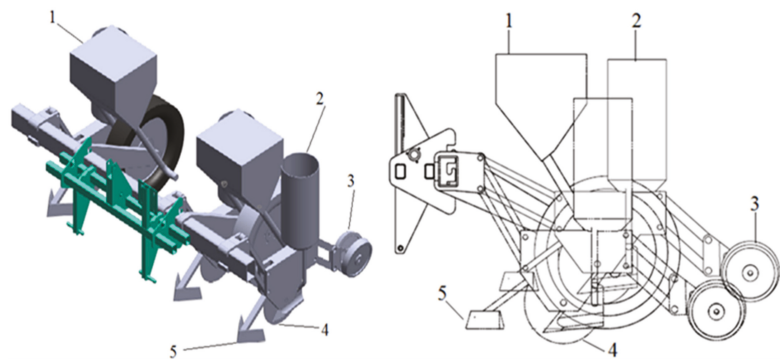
Design images of the no-till seeder prototype ((1) Fertilizer hopper; (2) Seed hopper; (3) Seed press roller; (4) Sowing coulter with cutting disc; (5) Row cleaning attachment).
